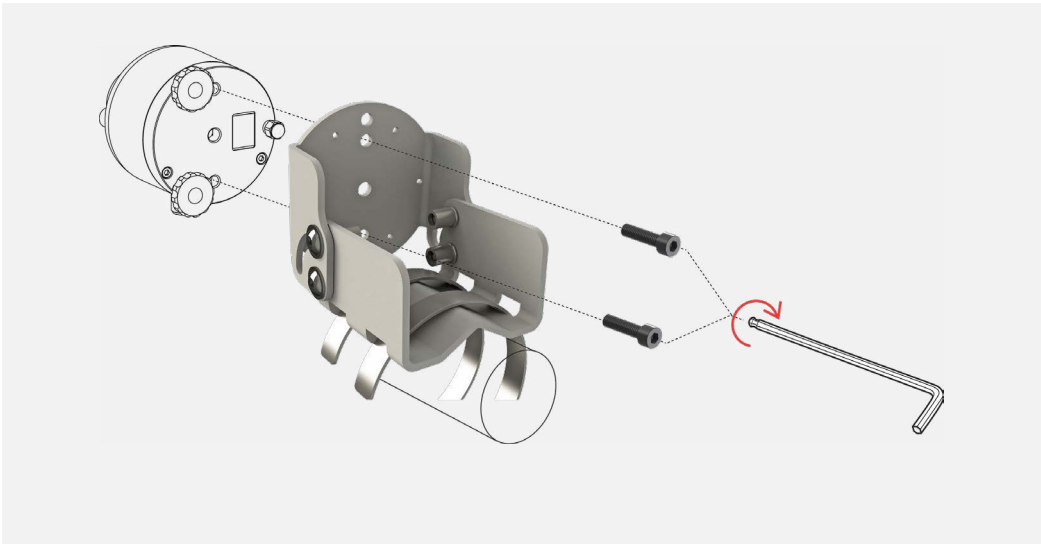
Installation of PMF01 on a horizontal crossarm, step 3b
